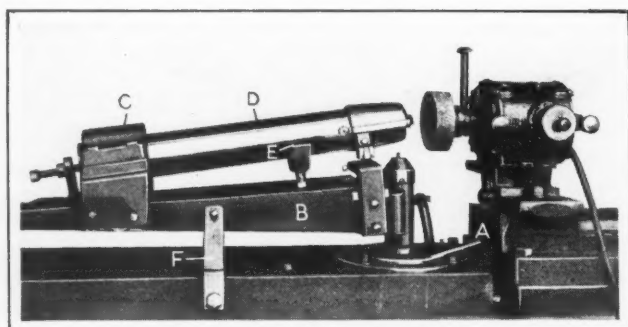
Set-up for Grinding End and Corner Radius of Boring Cutter
